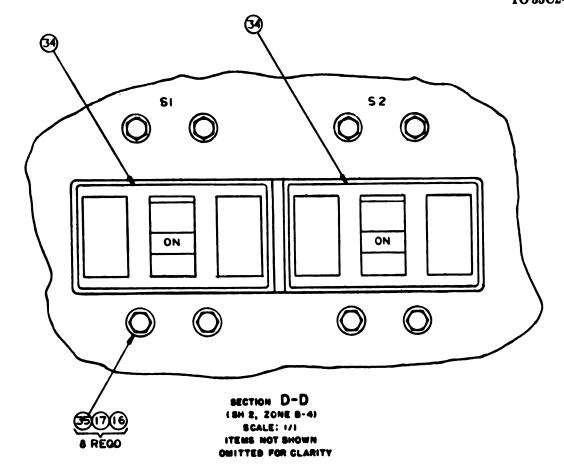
Switchbox Assembly (Sheet 5 of 7)
